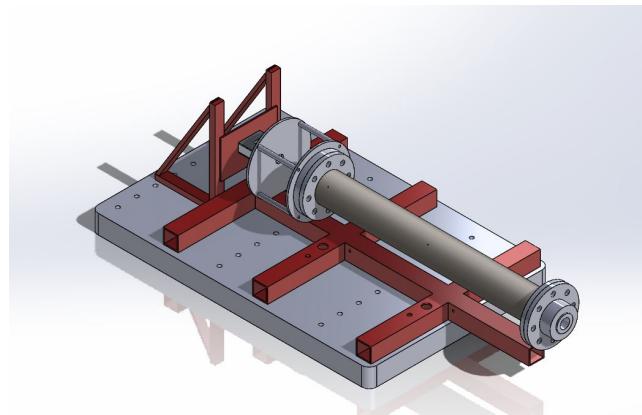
Hybrid Engine Assembly on the ICD Bench. Source: Own.
